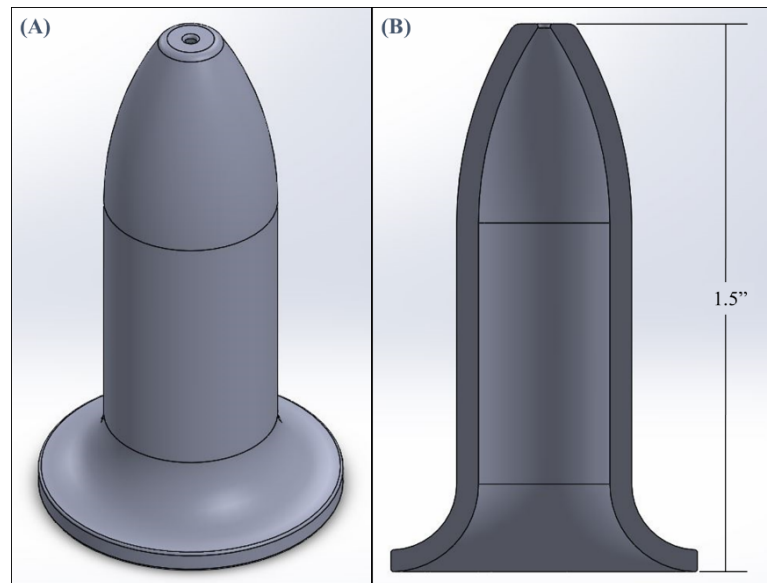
Second version of the bullet design that was produced. (A) isometric view, (B) section view
